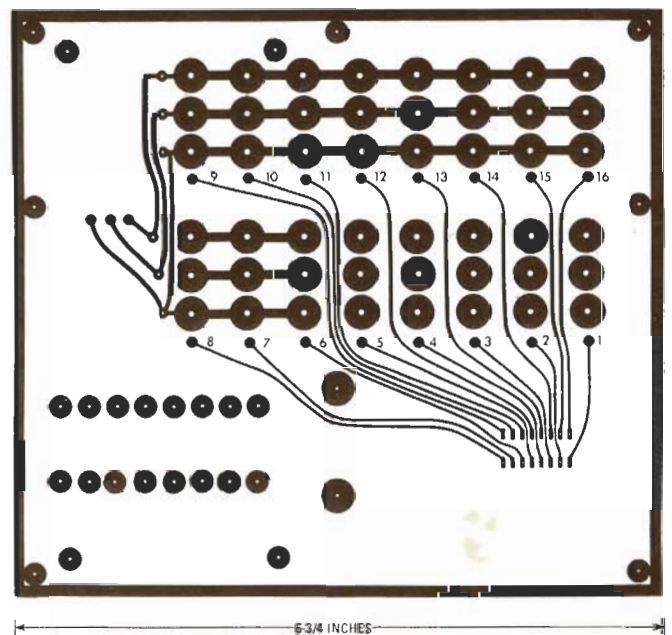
FOIL SIDE OF panel board. Holes for 16 LED's are at lower left.
